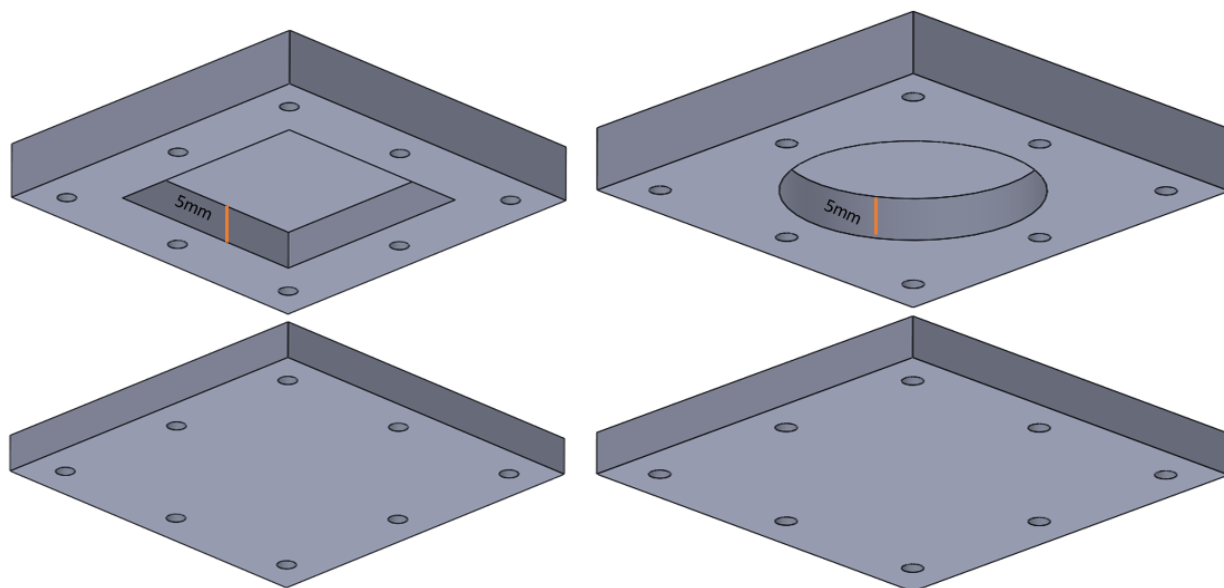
Exploded view of cubic (left) and cylindrical (right) caps for hybrid MREs
